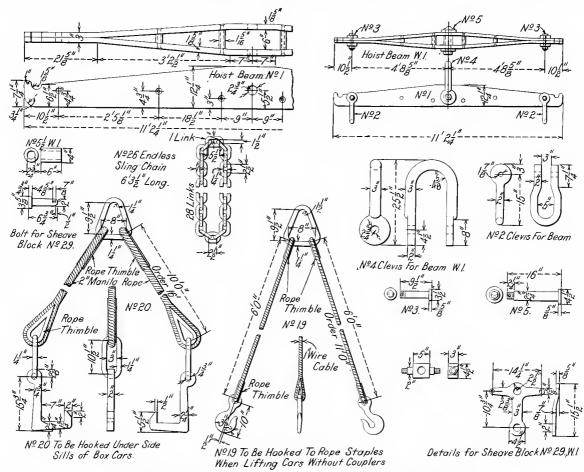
Chicago, Burlington & Quincy Wreck Train Tools.
